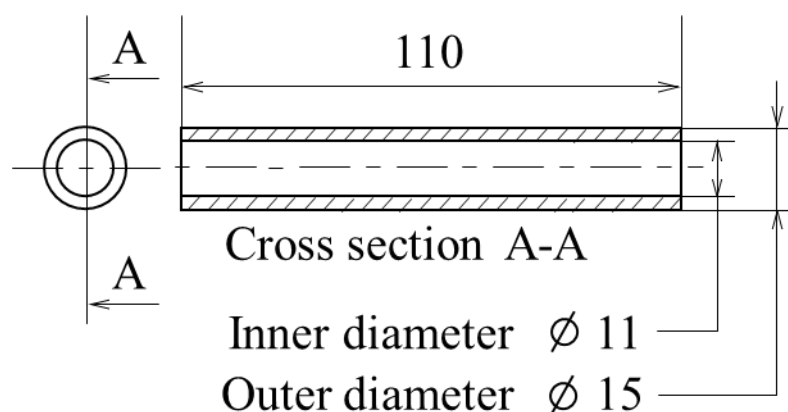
Geometry of specimen for the multiaxial tube expansion test. Dimensions are in mm.
